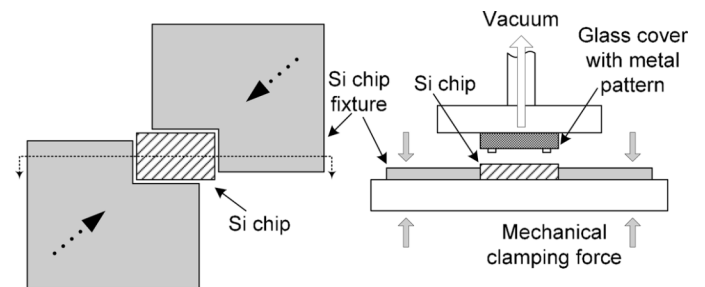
Die holding mechanism and fixture on the bonding equipment: (left) top view of the Si die fixture, (right) side view of the whole mechanism.
